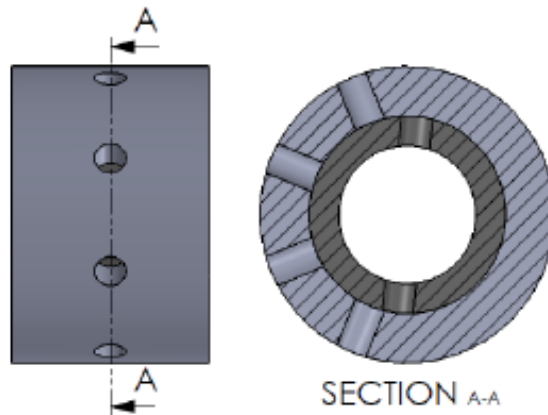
Spool valve using radial outputs instead of axial output as depicted by Chermesnok [12]
